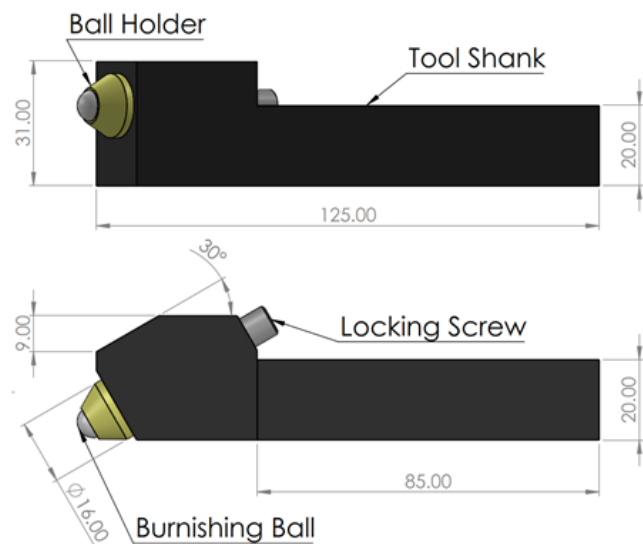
Rigid burnishing tool used in this study, with a tungsten carbide ball, 30° bend tip, and 20×20 mm shank. For the investigation purpose, a custom-designed spring-assisted burnishing tool was designed and manufactured to achieve the dimensions shown in Figure 5. This tool was purpose-built for the experimental study, incorporating several key design elements and material characteristics to ensure its effectiveness and reliability. The tool shank, an
